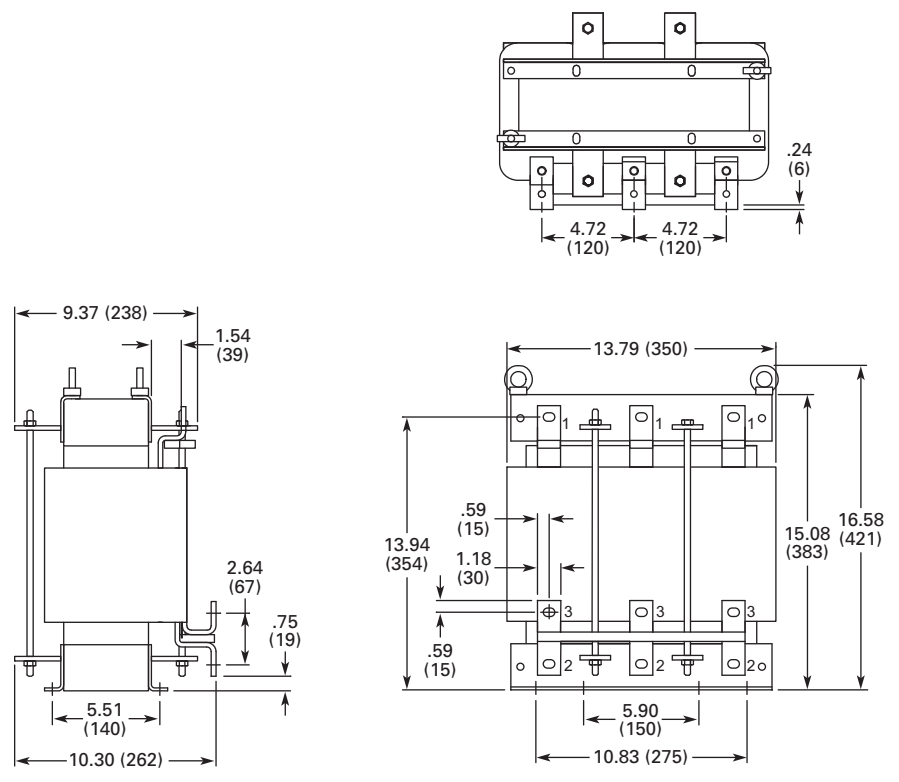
Dimensions of AC Choke CHK0400 in Inches (mm)
